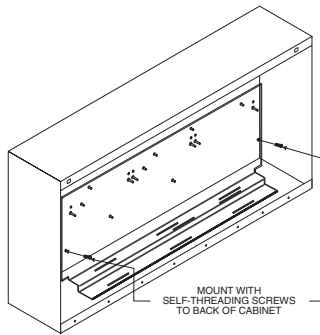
MOUNTING THE CH-6 CHASSIS
